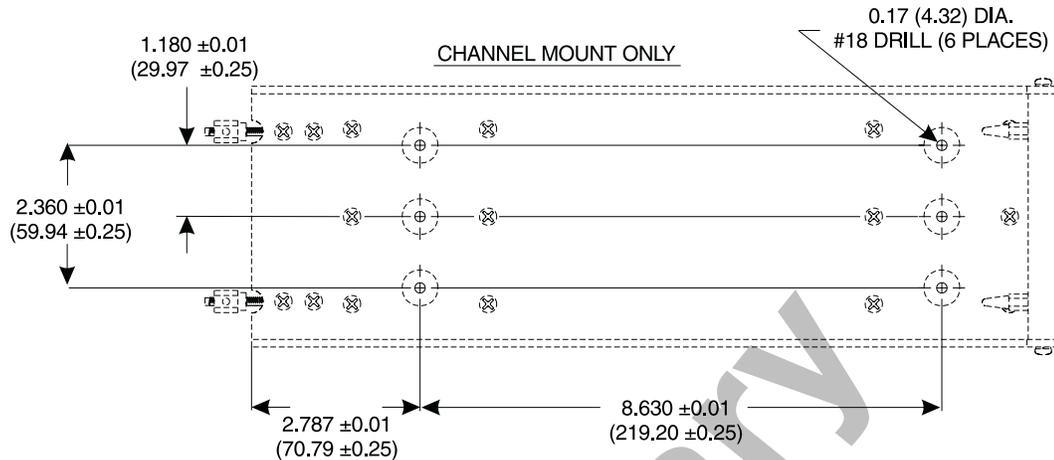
Mounting Holes for Standard Mounting Tray, P/N 805-10870-001
